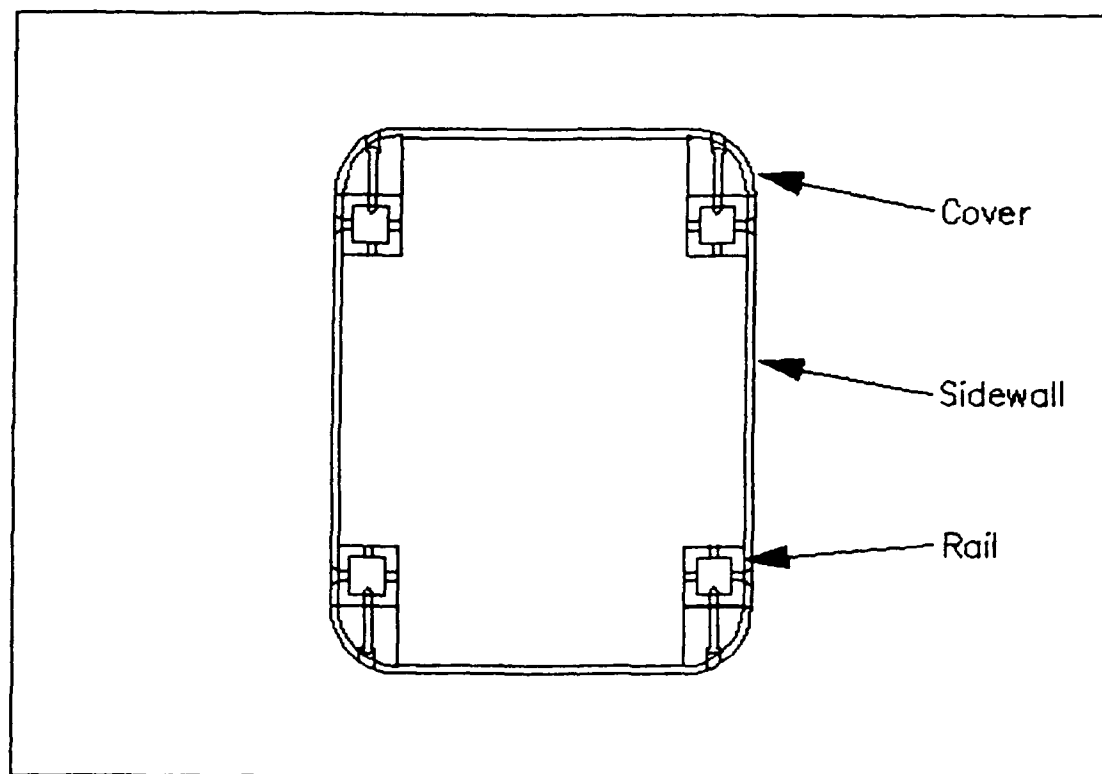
Rails/Sidewalls/Covers Fuselage Structure
